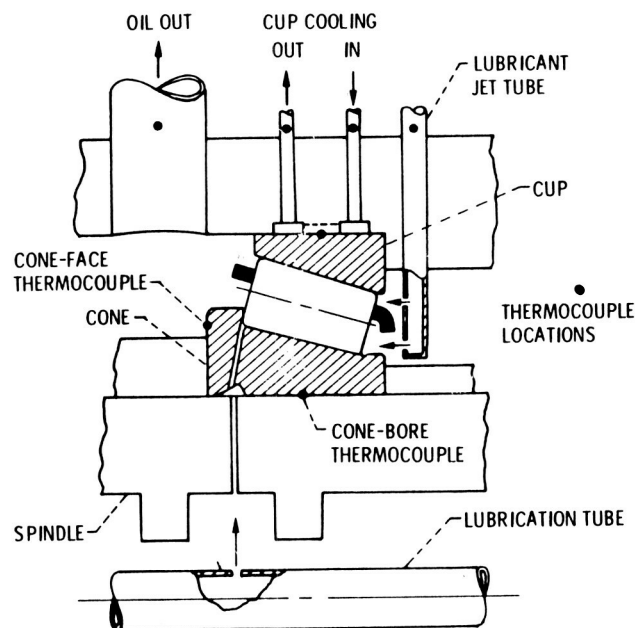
Tapered-roller bearing with cone-rib and jet lubrication. (From ref. 11.)
